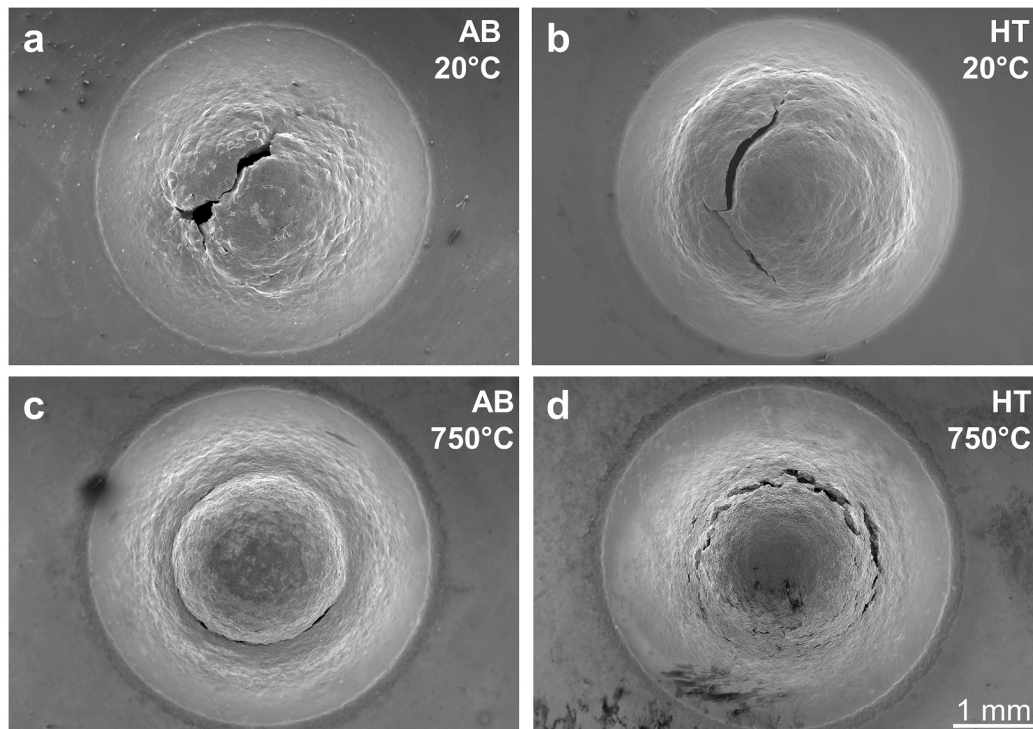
Fracture surfaces of SP tested LPBF DSS 2205 in both as-built and heat-treated conditions, at 20 and 750 °C.
